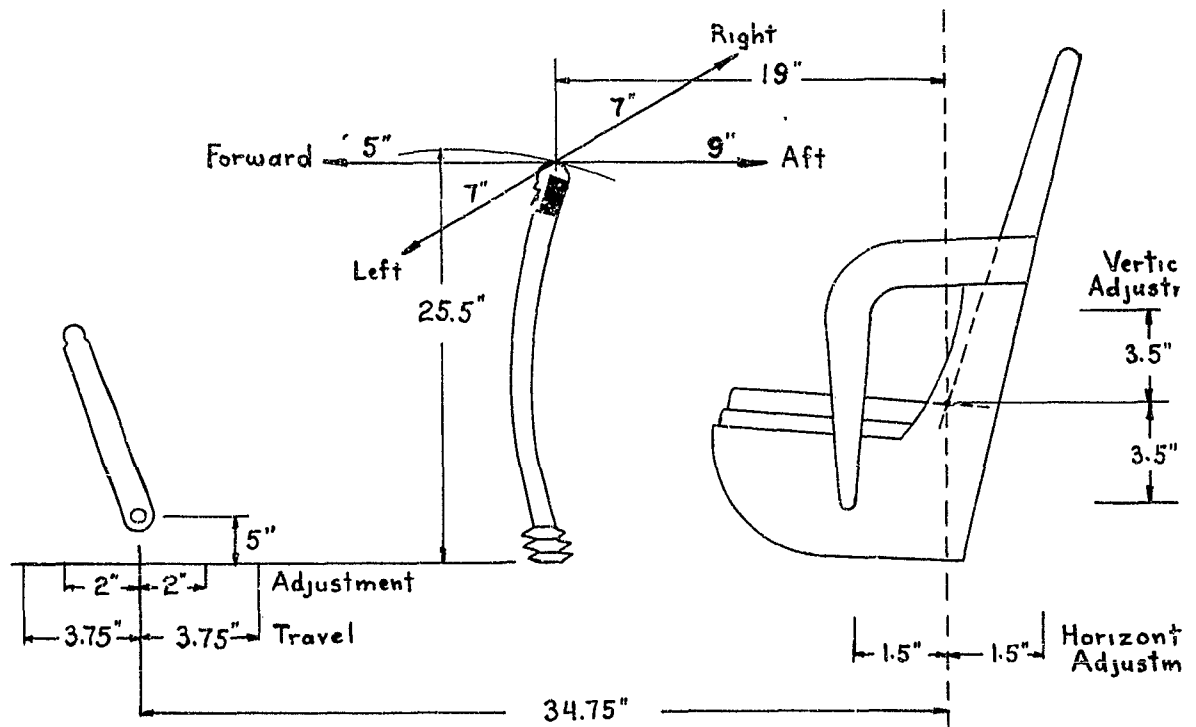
Basic cockpit dimensions in the standard airplane cockpit.
